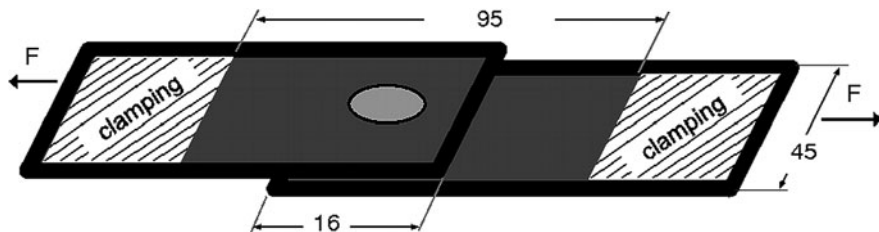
Specimen geometry for the mechanical tests (all dimensions in mm, not to scale)
